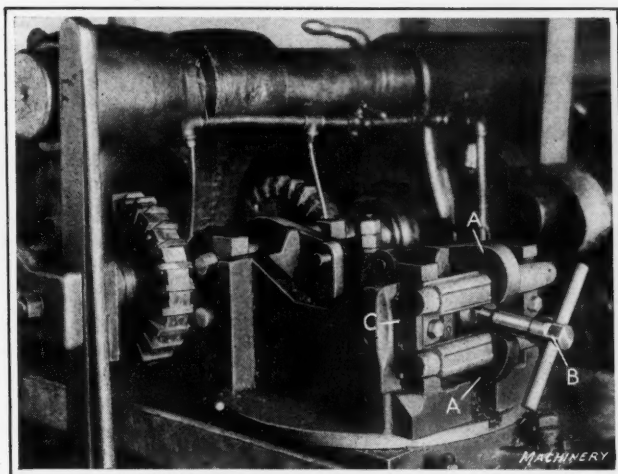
Milling Machine equipped with Indexing Fixture for straddle-milling Transmission Shafts
